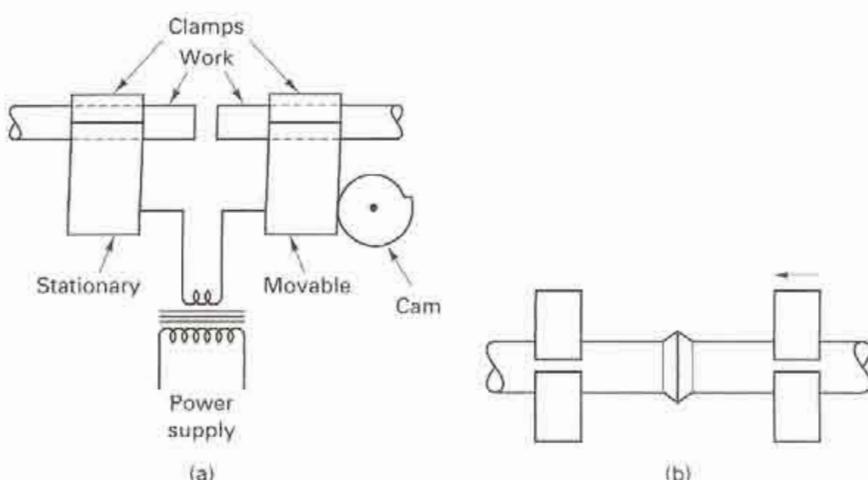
Schematic diagram of the flash-welding process. (a) Equipment and setup; (b) completed weld.
